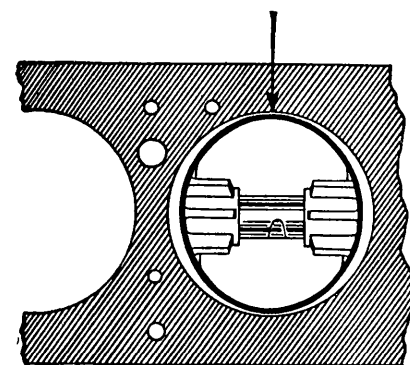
Arrow indicates where feler should be used when checking piston clearance. 1935-52
